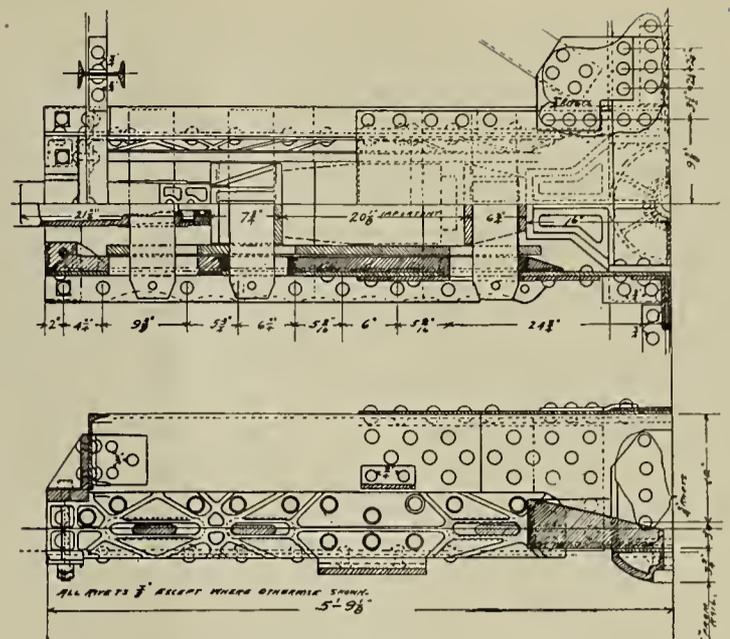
FARLOW-WESTINGHOUSE DRAFT GEAR.
